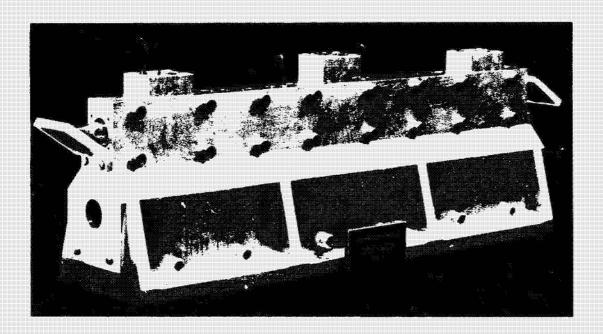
First Configuration of Laser Tube to Be Vibration Qualified
